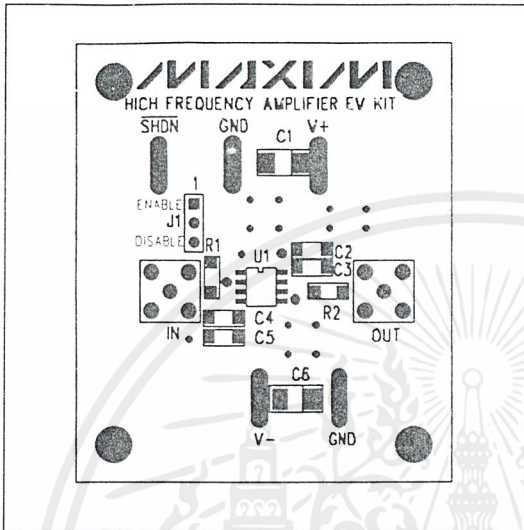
MAX477 EV Kit Component Placement Guide—Component Side
